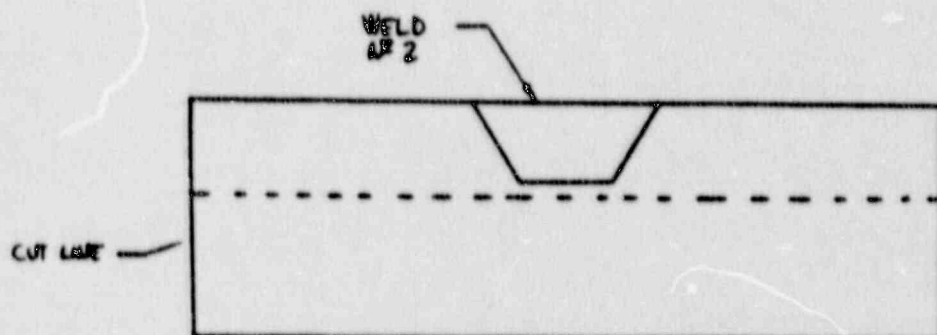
LAYOUT PLAN FOR REMOVING SAMPLE BLANKS FOR 1-1/4" THICKNESS GROOVE.
